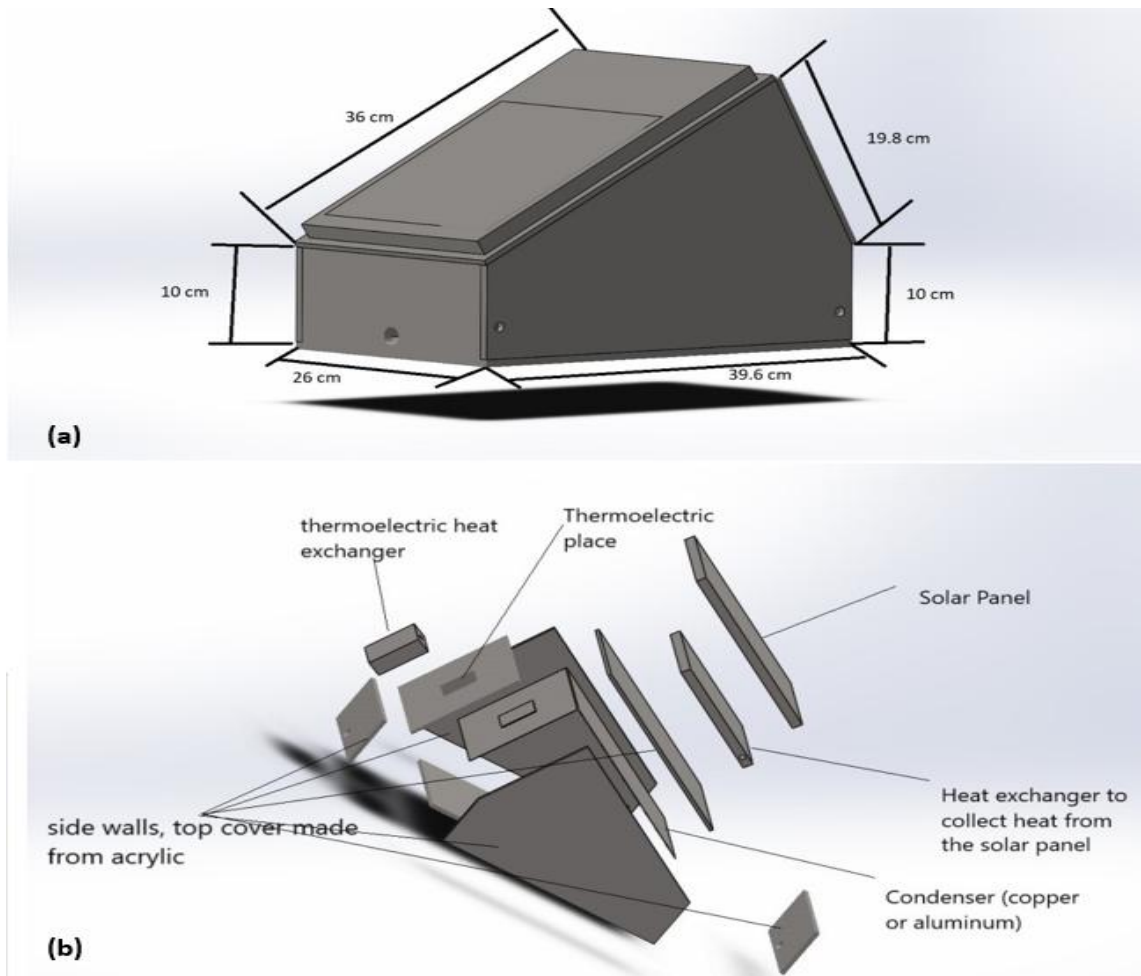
(a) the designed system diamention, (b) exploded view of the system and it is component
